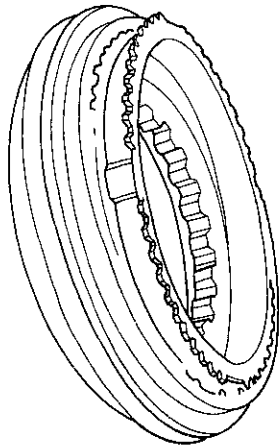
Installing First Gear Stop Ring In Synchro Hub
